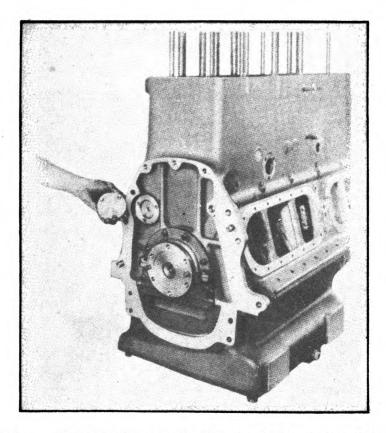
REAR VIEW, FLYWHEEL REMOVED FROM CRANKSHAFT
